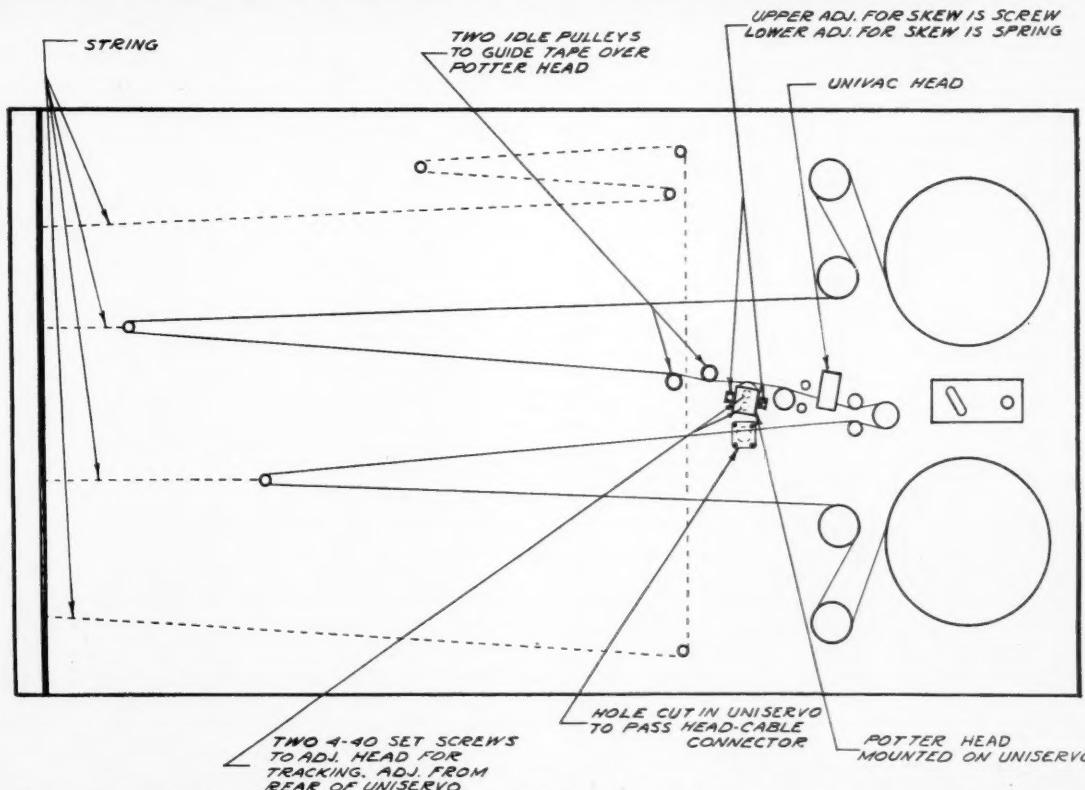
Schematic drawing of front of Uniservo (looked at sideways), showing Potter magnetic head mounted in place.
